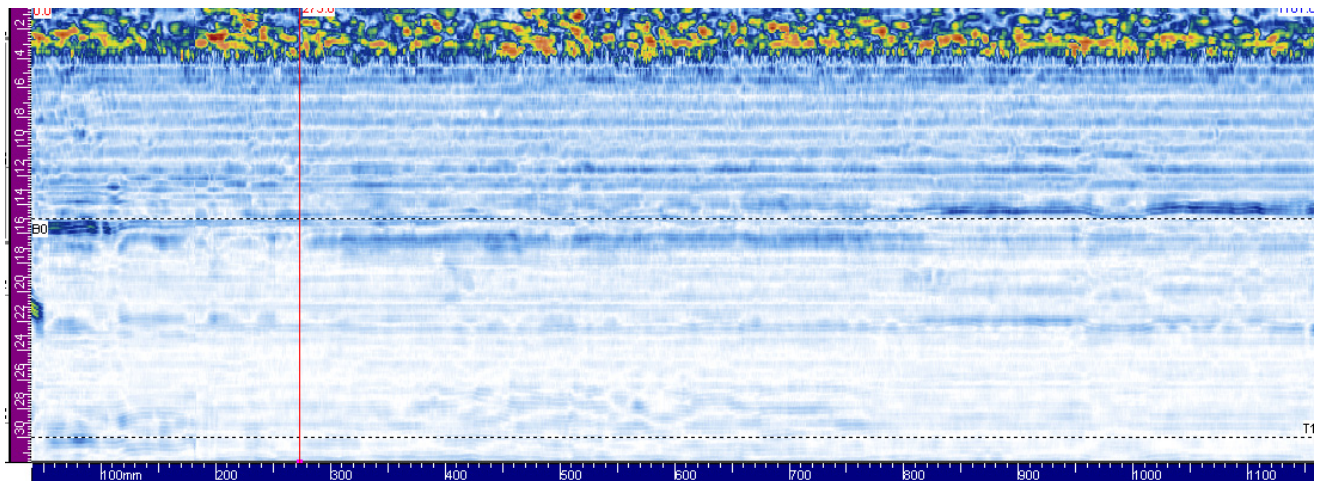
Typical scan of butt welded sample with no flaws.
